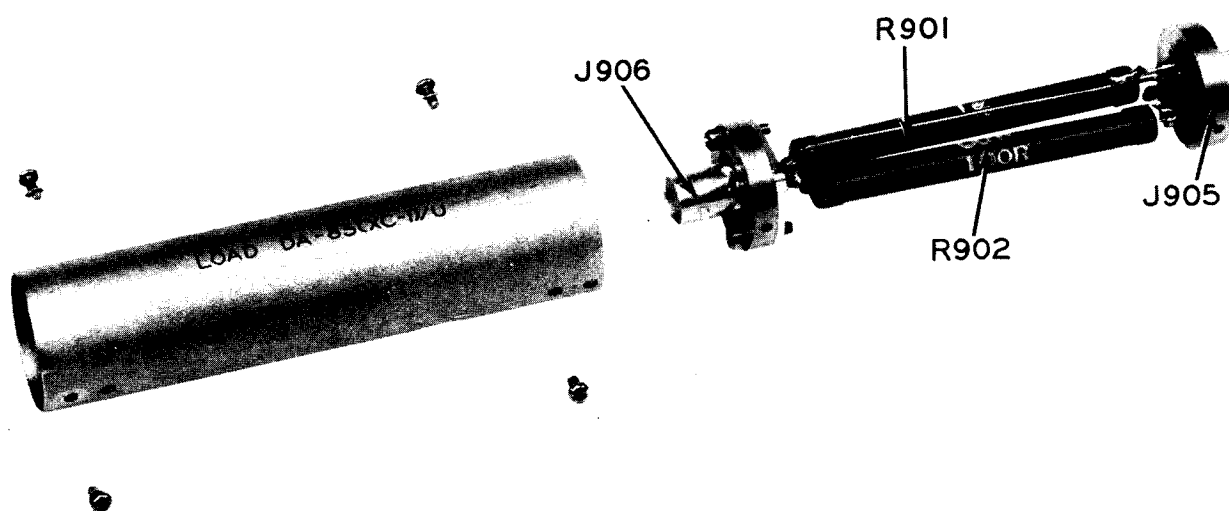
Electrical Dummy Load DA-85/U, disassembled.
